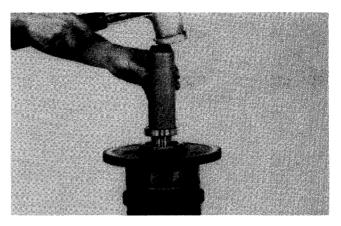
Install clutch gear outer bearing. NOTE: Outer bearing has a shield in it, this shield must be up.
